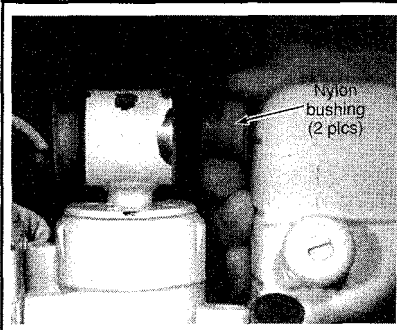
Remove the two nylon bushings from the tilt cylinder
